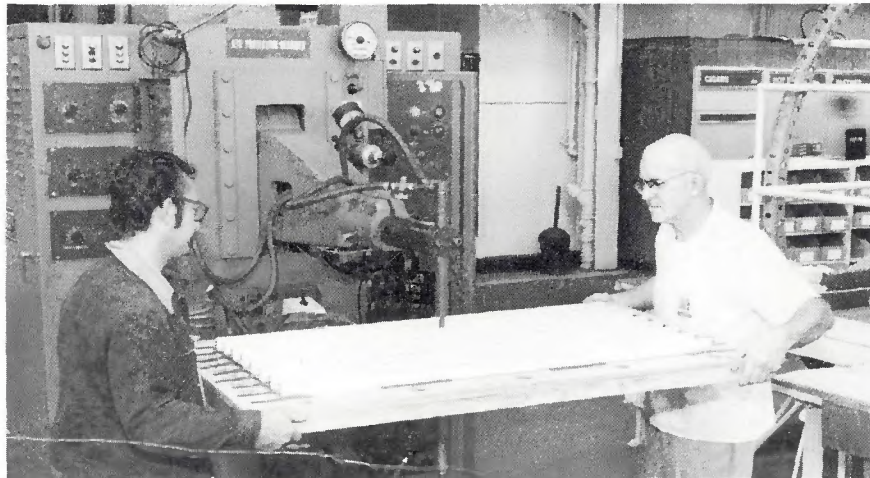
B/AI compression panel weld setup. The panel is allowed to rest on the lower electrode to illustrate panel curvature in the relaxed position. During welding, the fixture is raised to remove weight from the lower welding electrode
